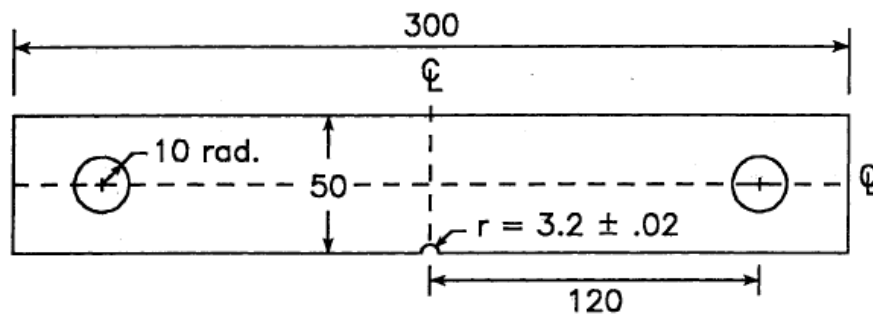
Single Edge Notch Tension Specimen [8], dimensions in mm
